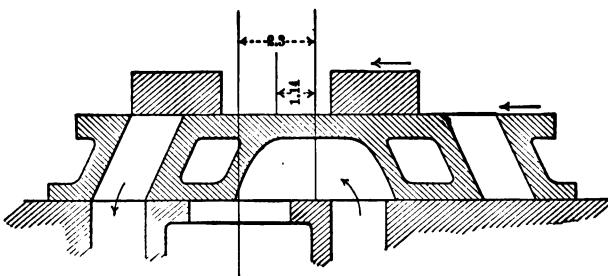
Meyer Valve Designed in Figs. 61 and 62.
